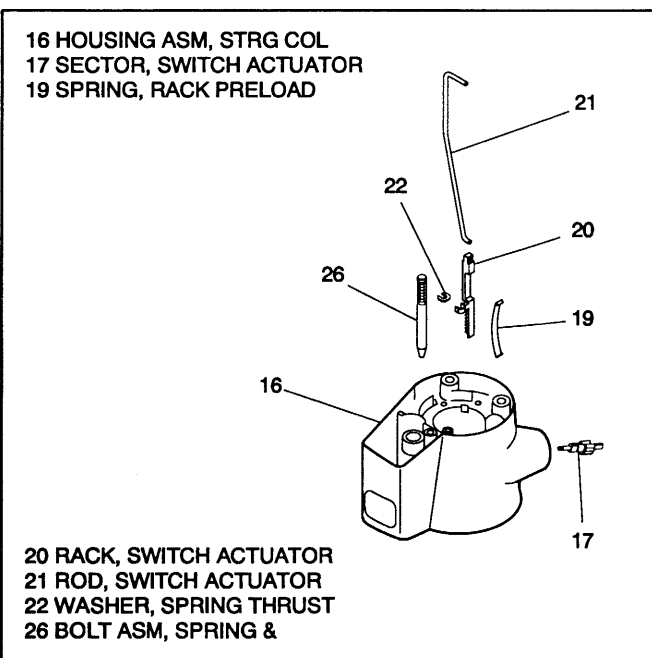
Removing Switch Actuator Rack With Spring & Bolt Assembly
